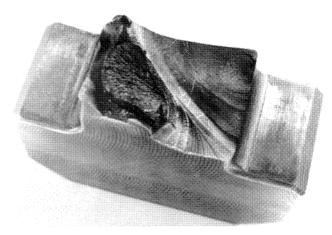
Machining Marks in a First Stage Blade Root and Typical Fractured Neck.
